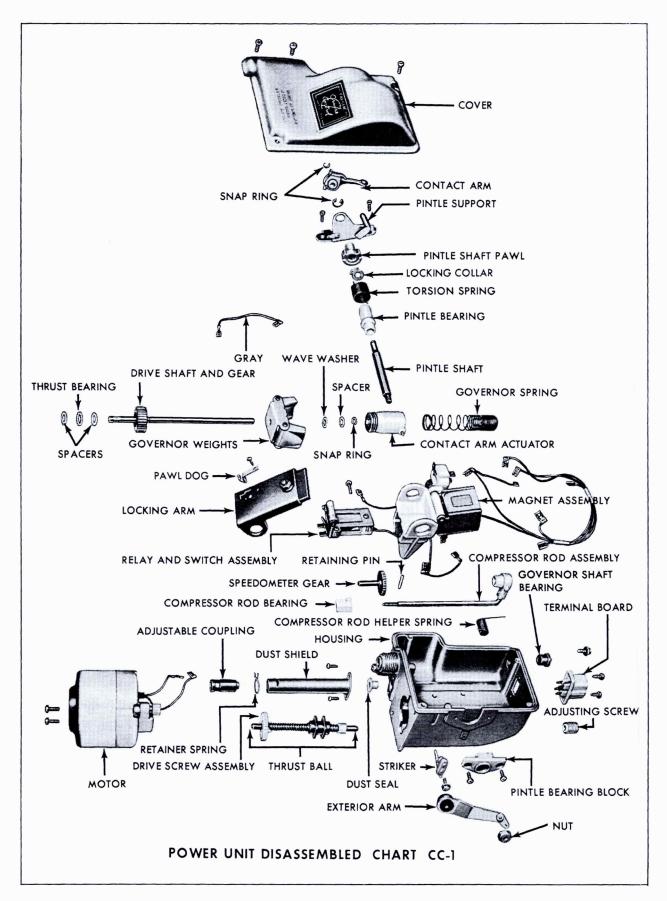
Power Unit Disassembled (Exc. 693)
